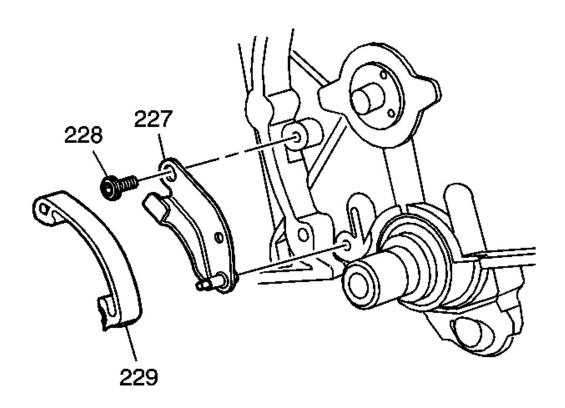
View Of Timing Chain Tensioner Bracket, Bolt & Shoe Courtesy of GENERAL MOTORS CORP.
